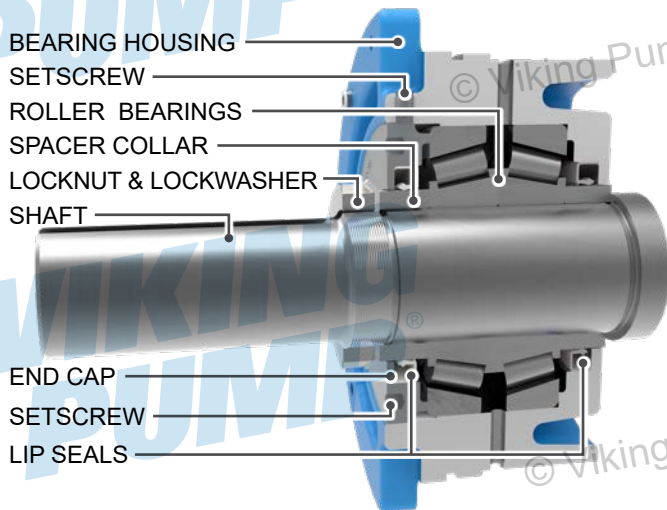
BEARING HOUSING ASSEMBLY (Q, QS, N)
